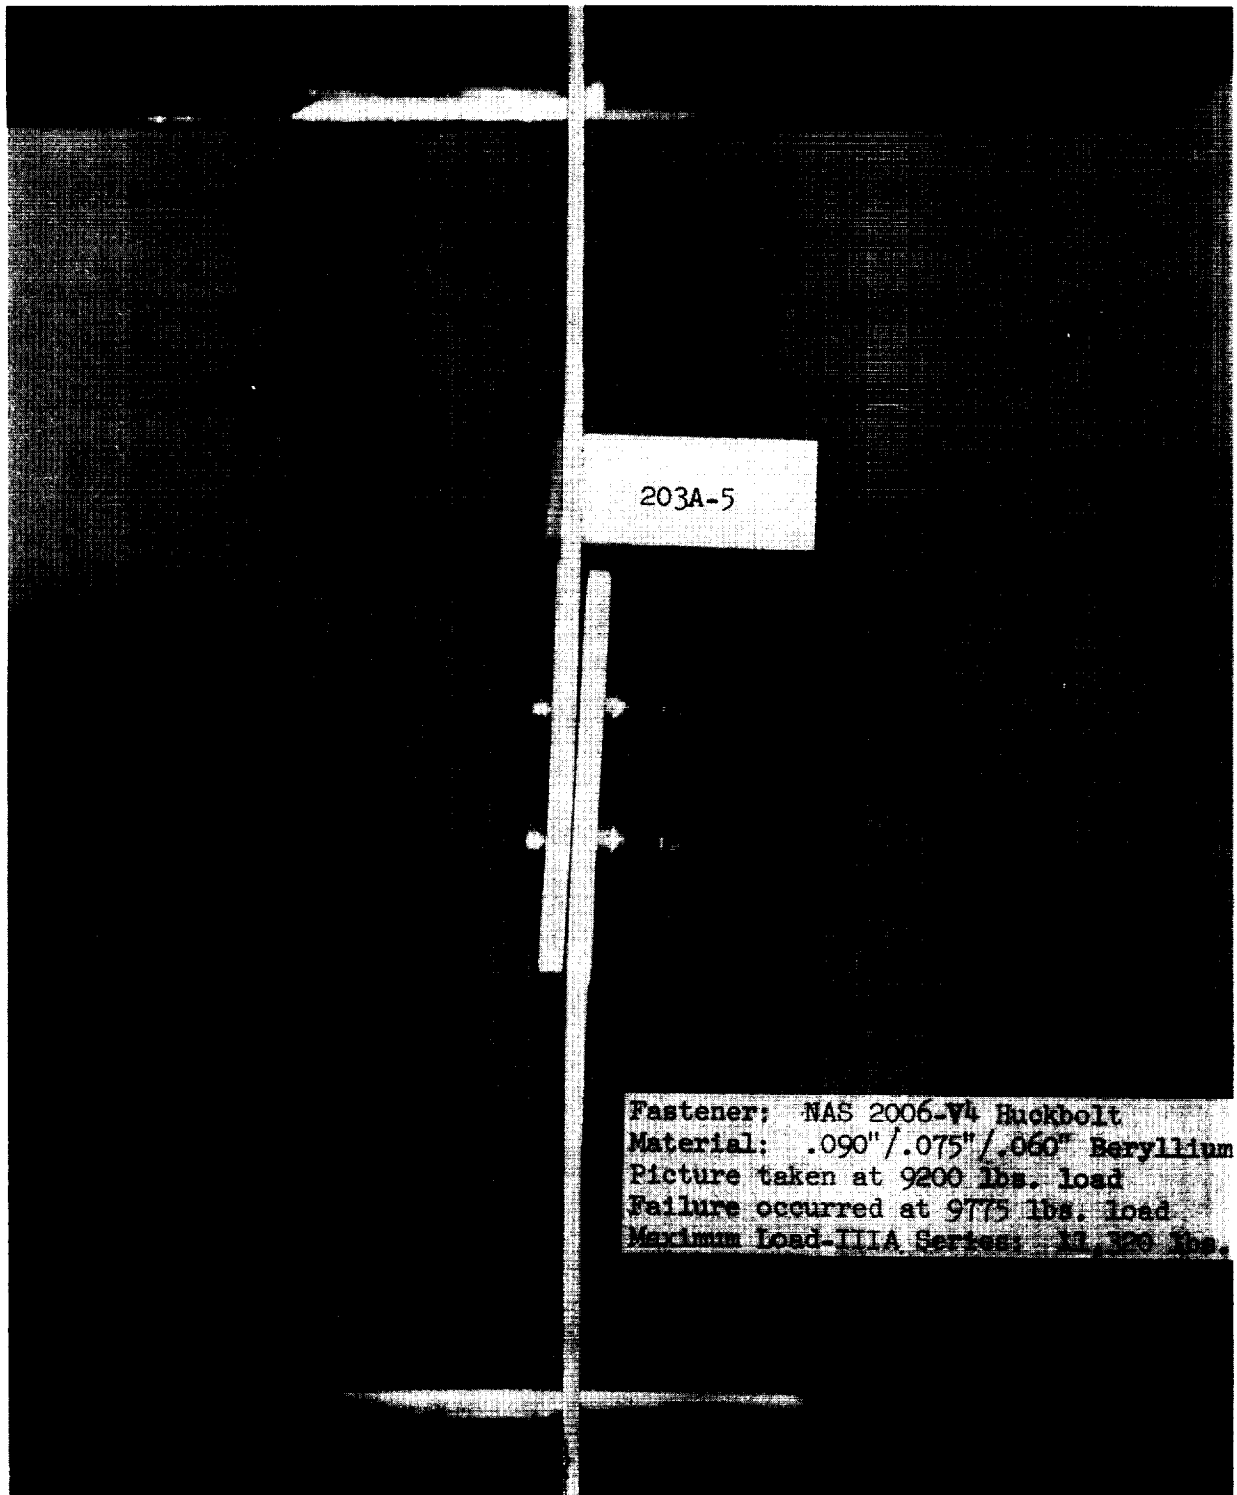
TYPE IIIA SPECIMEN - TENSILE TEST
